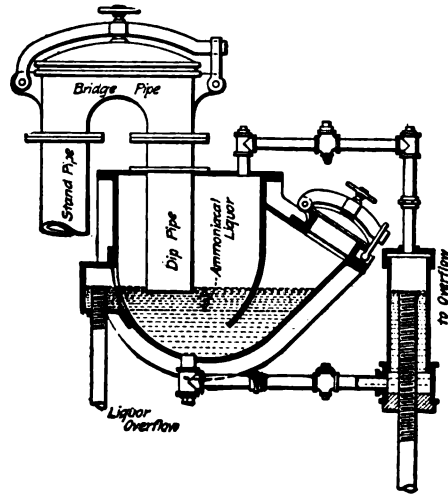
CROSS-SECTION OF HYDRAULIC MAIN.
